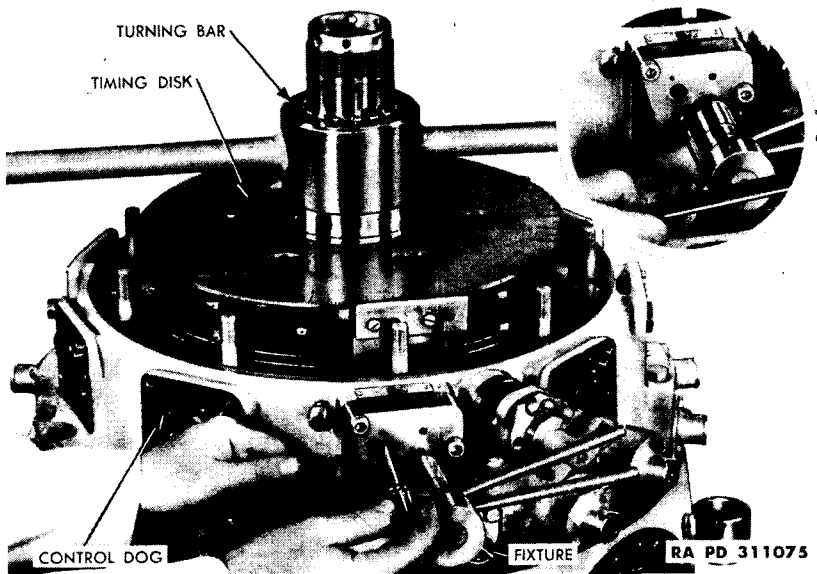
Adjusting Fuel Pump Control Dogs, Using Bar 5A2165, Disk 5A2164, and Fixture 5A1368
